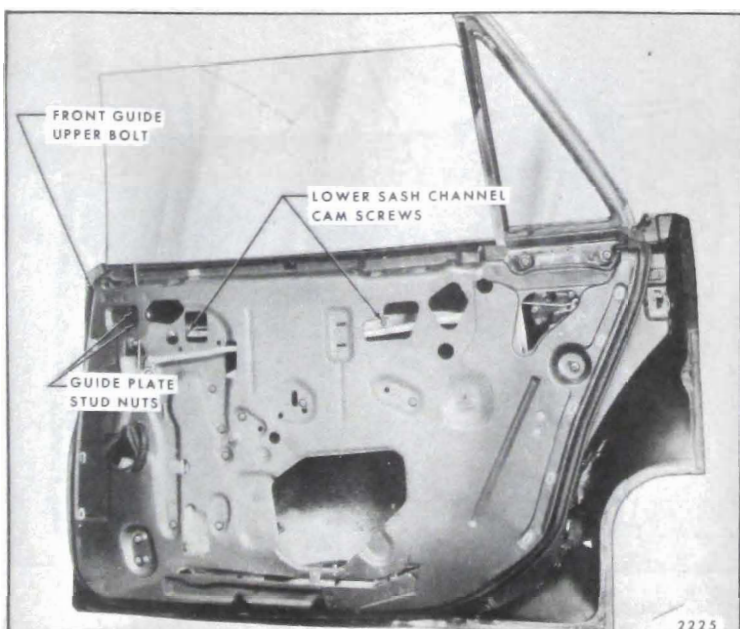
Rear Door Window Removal - 68069-68169 Styles
